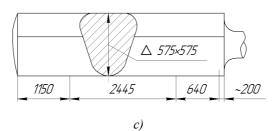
Forging piece sketch of the six-throw crankshaft with a triangular cross-section and cylindrical necks
